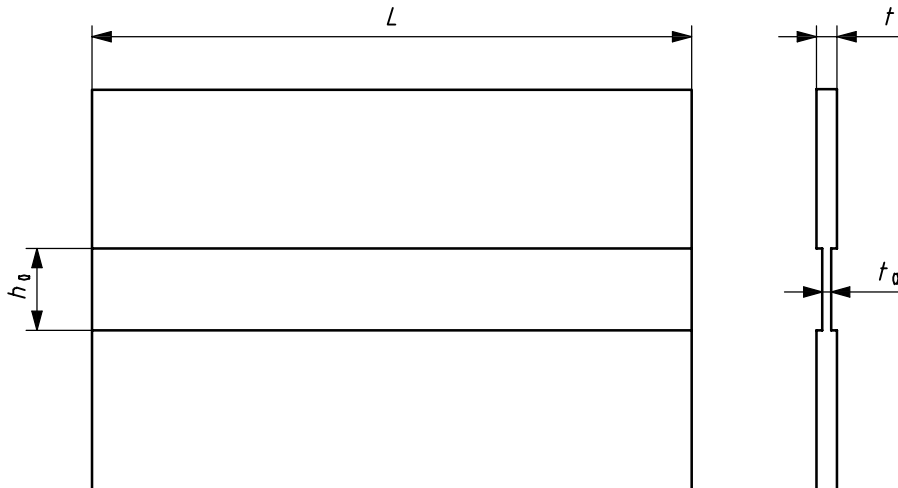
Shape of pure-shear test piece for fatigue crack growth rate measurements
